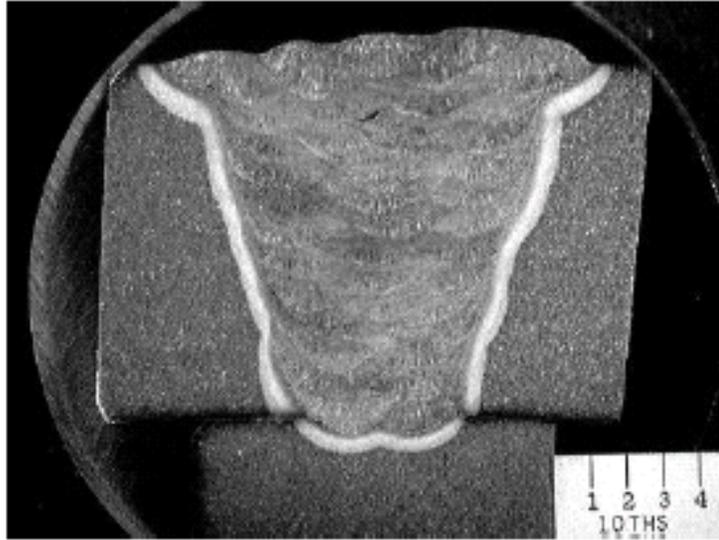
Cross-section of shielded metal arc weld, IC.
